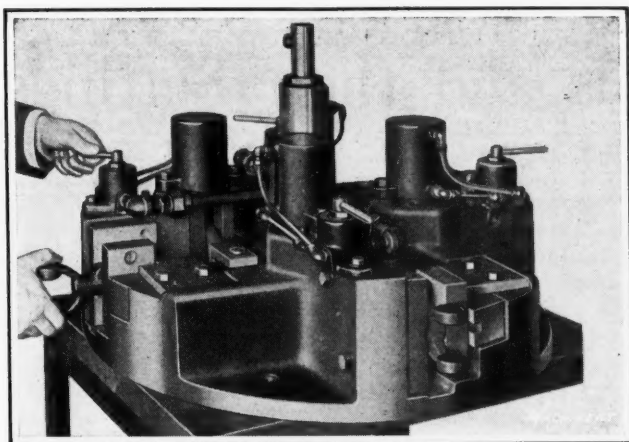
Type of Fixture used for milling a Group or "Family" of Fork-shaped Automobile Parts
